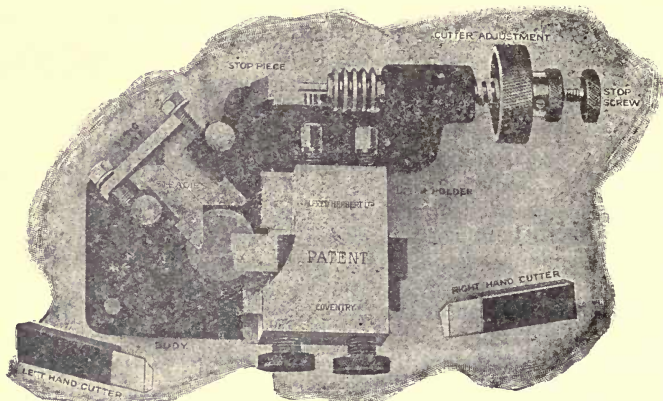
TURNING TOOLS—VIEW SHOWING RIGHT AND LEFT-HAND CUTTERS.
